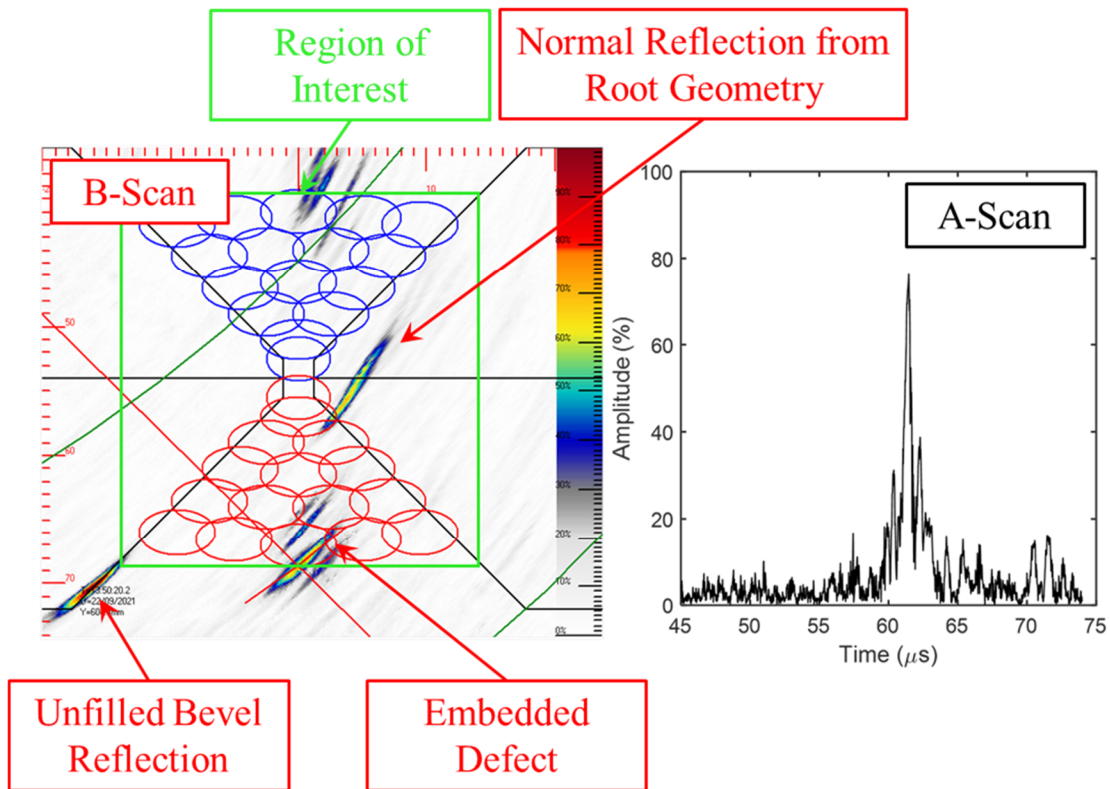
In-process UT inspection of a partially filled multi-pass weld showing correct detection of an intentionally embedded tungsten defect inserted in layer 6 (Defect 3) and a normal reflection from the root geometry
